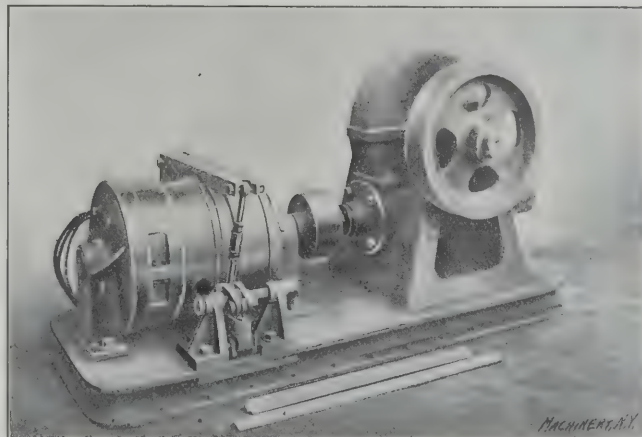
Application of One-speed Spinner Motor to Haulage Gear
